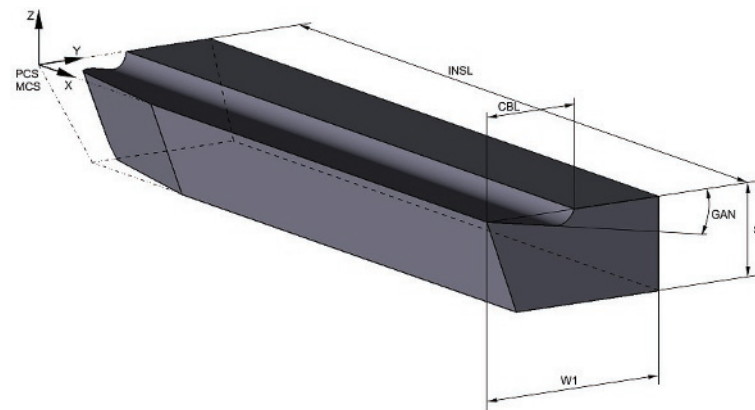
Chip breaker geometry of a reaming insert with one cutting edge and rounded plug chamfer
